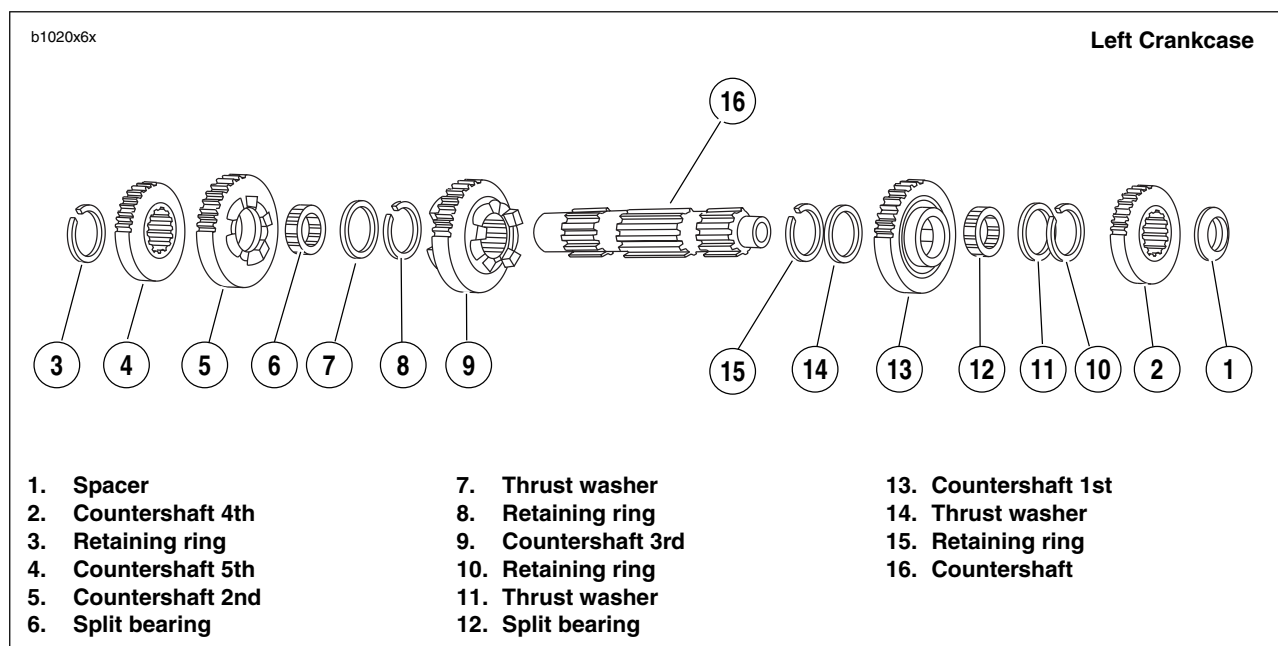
Transmission Countershaft Assembly Once Removed from Left Crankcase/Disassembly
